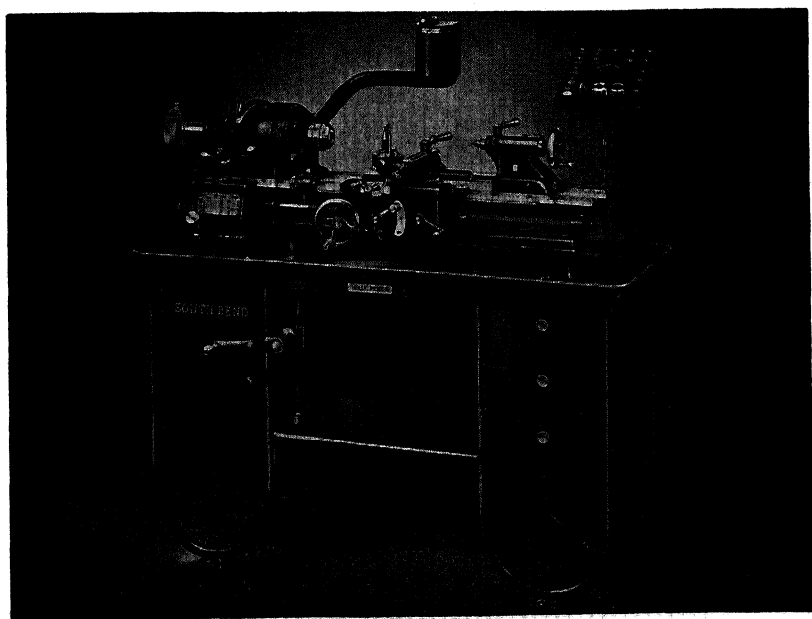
A unique bench design for a lathe providing pleasing appearance, made possible by arc welding.
